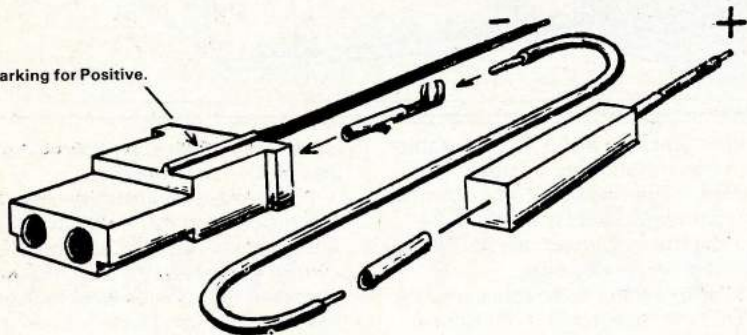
Plug & Socket assembly: Positive is marked & cannot short if fitted thus.
